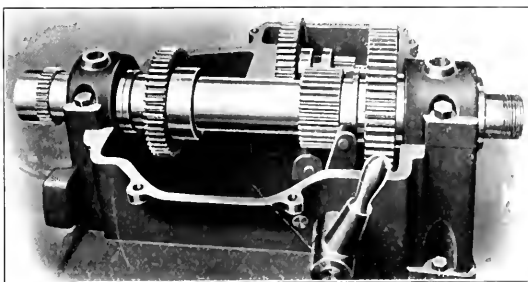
Back-gears on 14-inch Lathe and Lever for throwing them into Engagement
